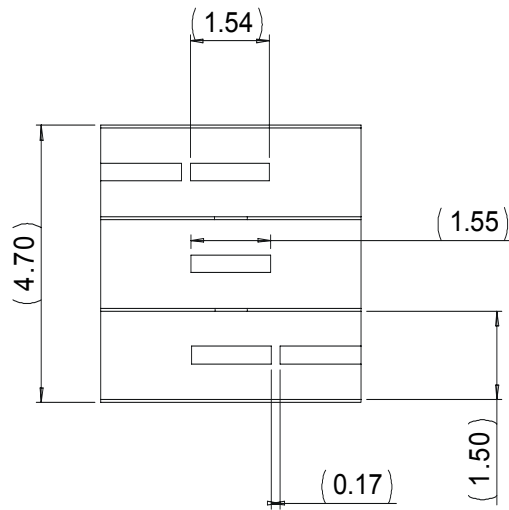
Technical drawings of the narrowband 40 GHz filter
